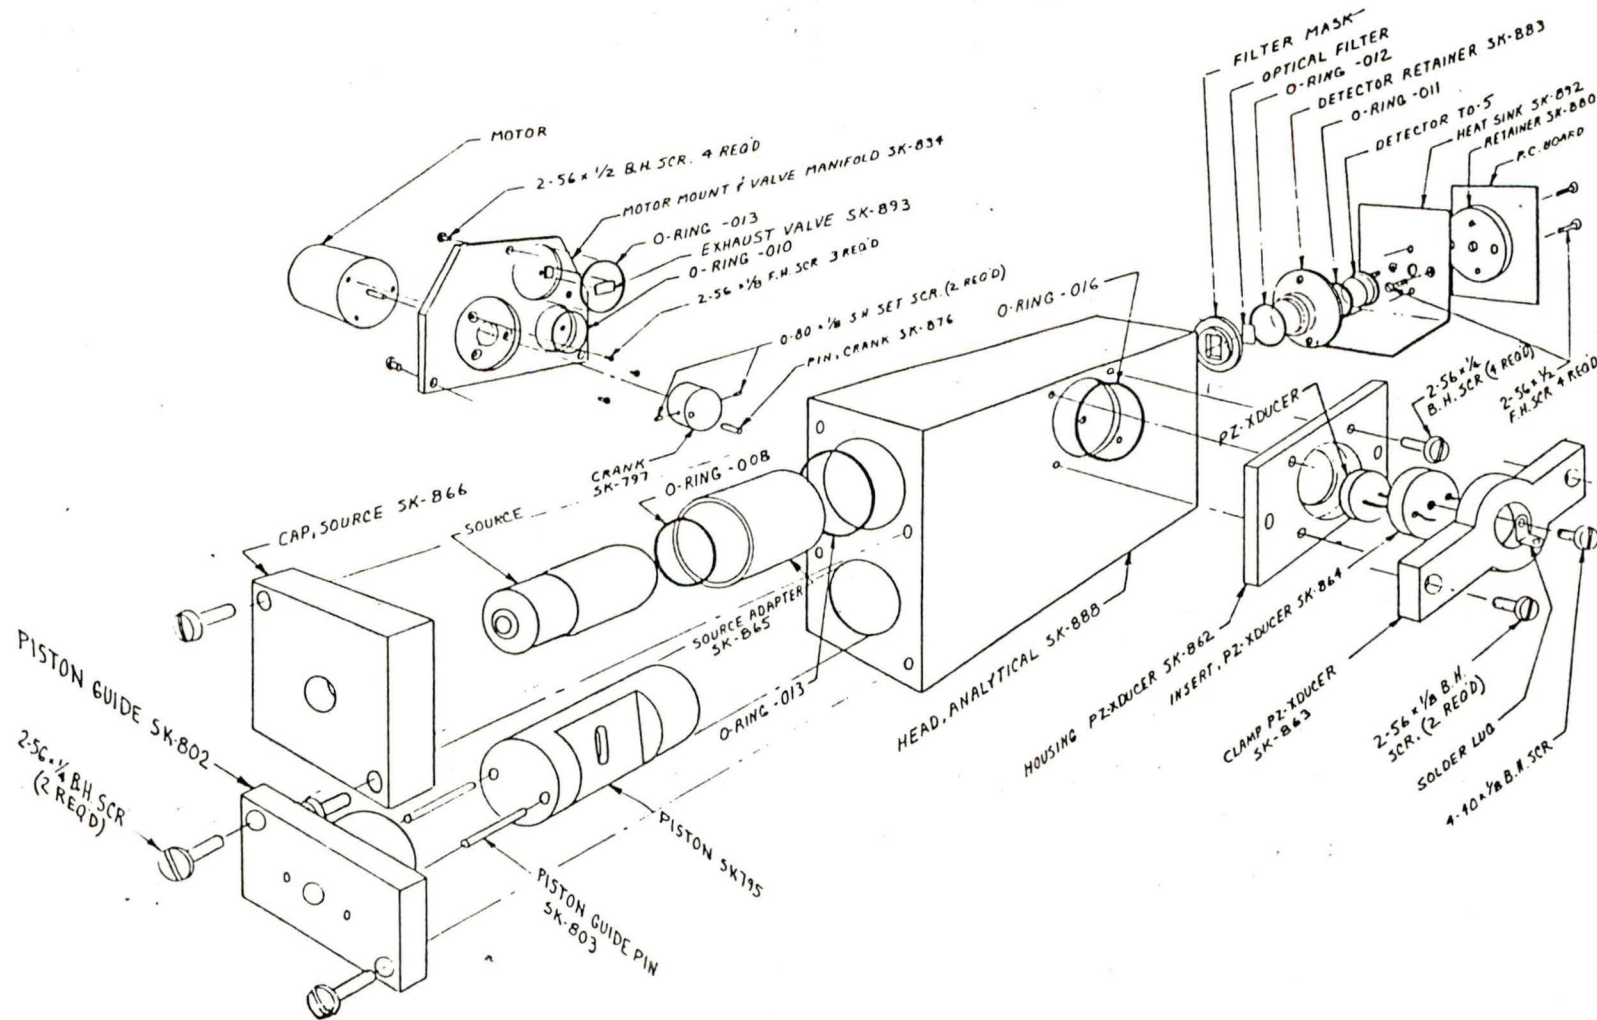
VIEW OF THE SAMPLE-CELL ASSEMBLY.
